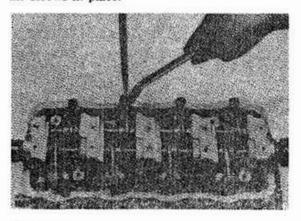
Loosen rocker arm shaft securing screws: there
